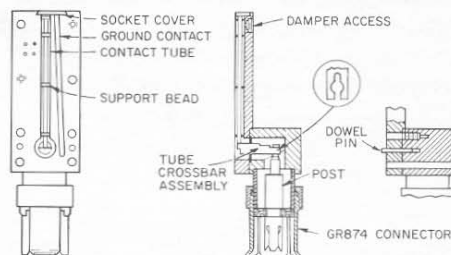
Cross-section drawings showing internal configuration of new mounts.
